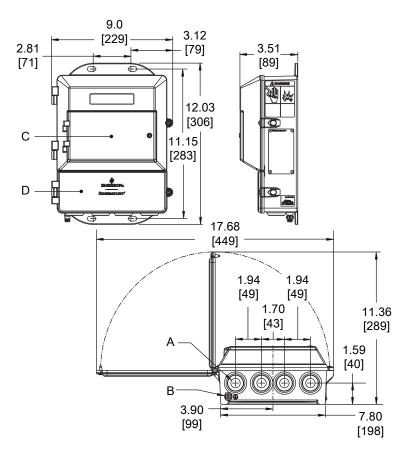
Rosemount 8712EM Dimensional Drawing
